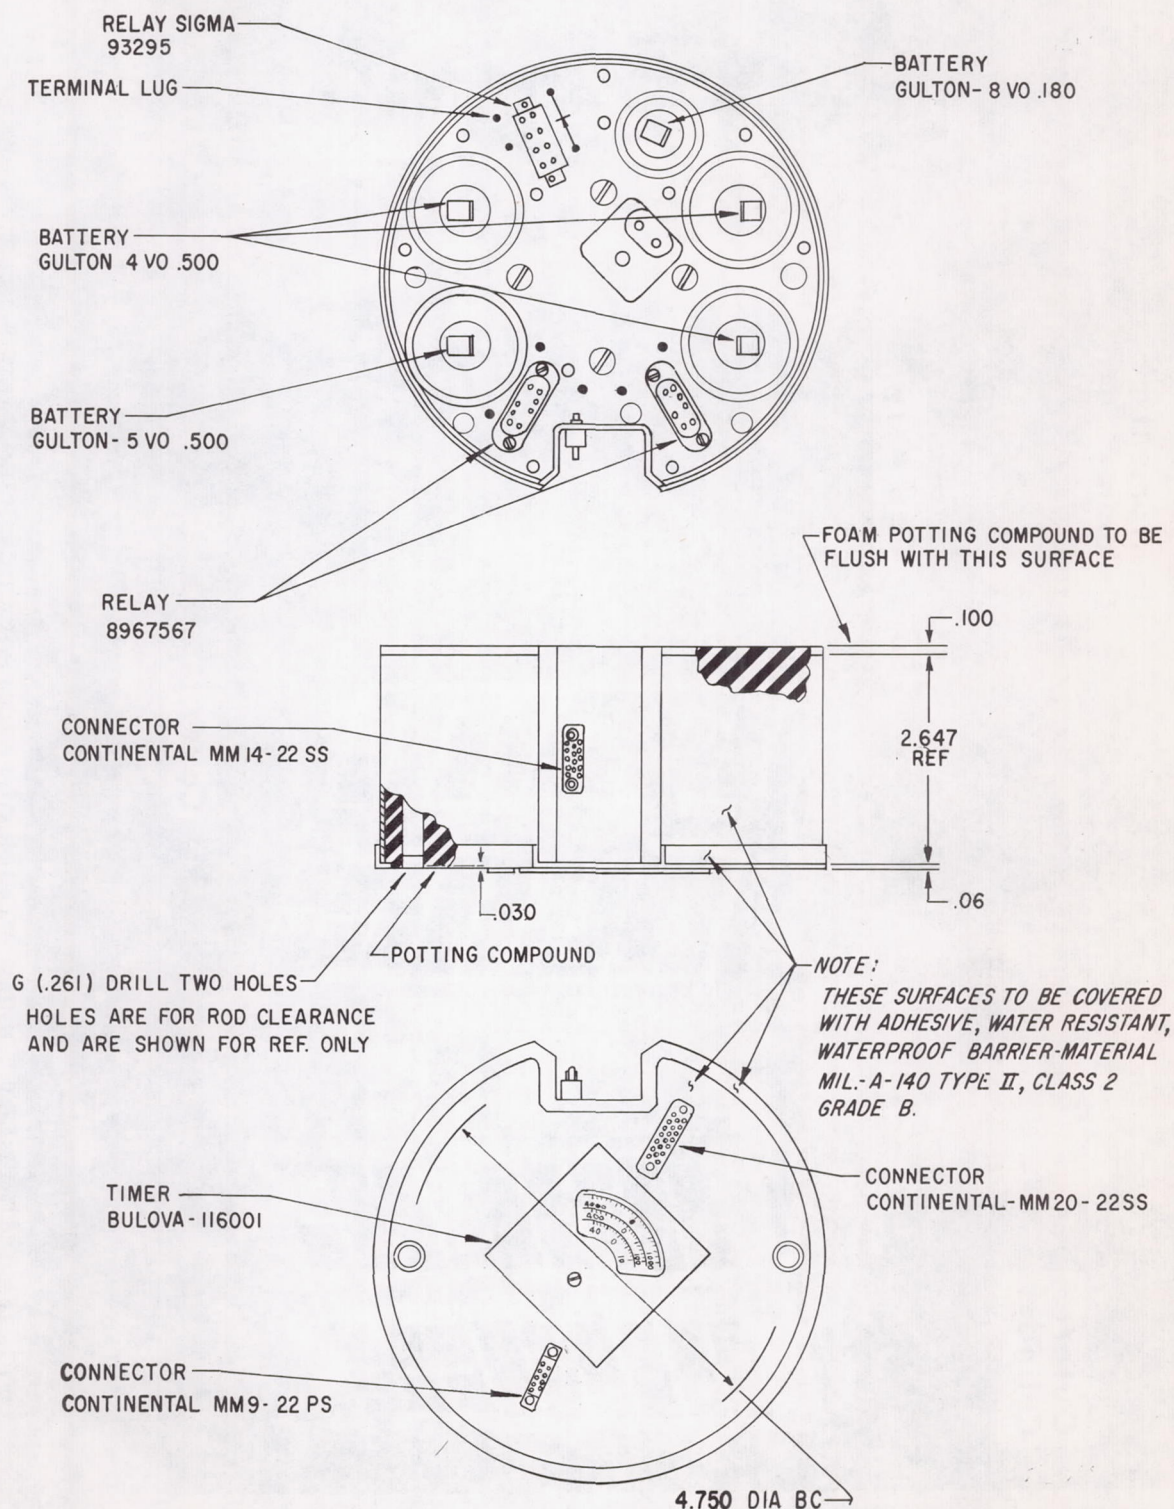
BATTERY AND DISTRIBUTOR ASSEMBLY
